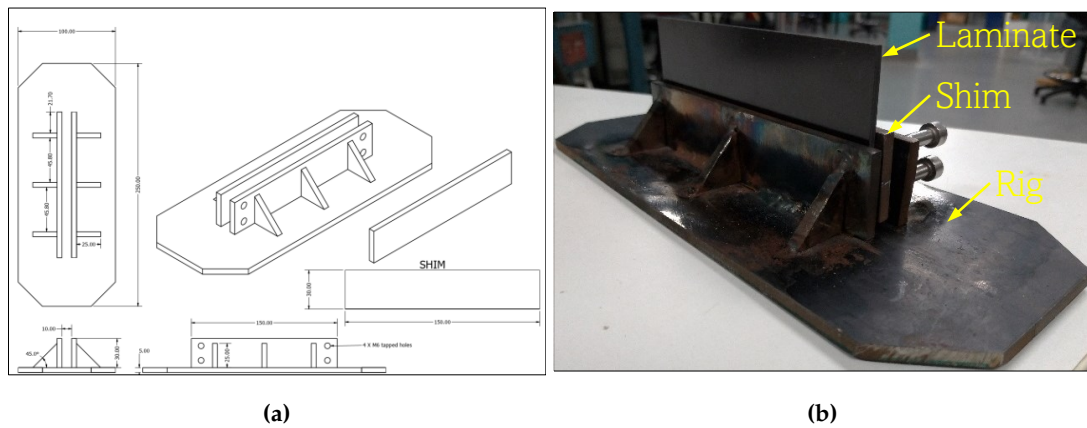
Edge impact test rig manufactured for conducting the experimental testing. (a) rig drawings with measurements reproduced from [286]. (b) Edge impact specimen in the testing rig.
